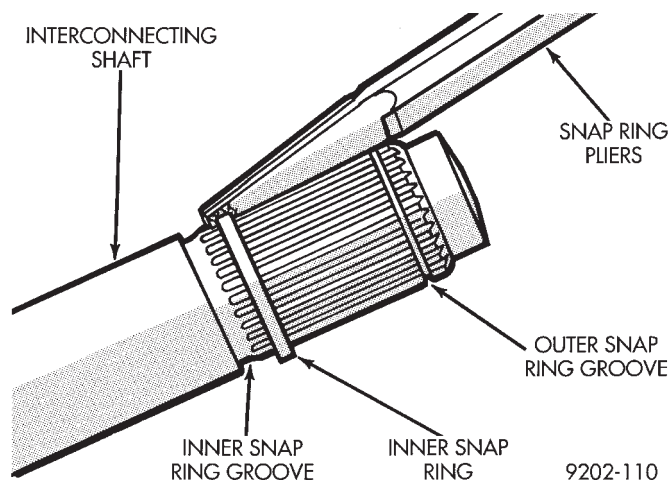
Tripod Assembly Removal From Interconnecting Shaft
